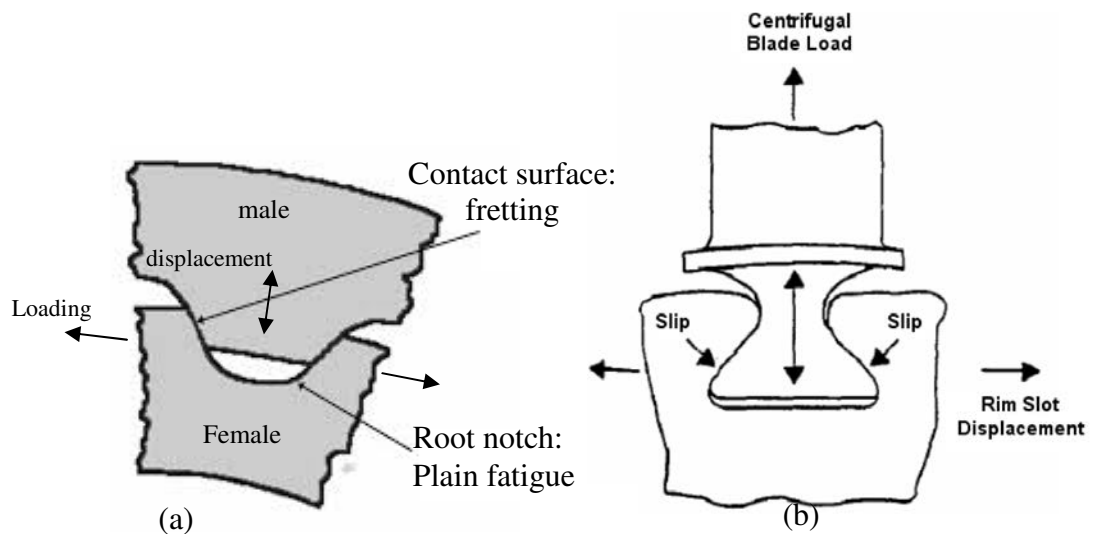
fretting fatigue on (a) spline coupling (b) dovetail joint.
